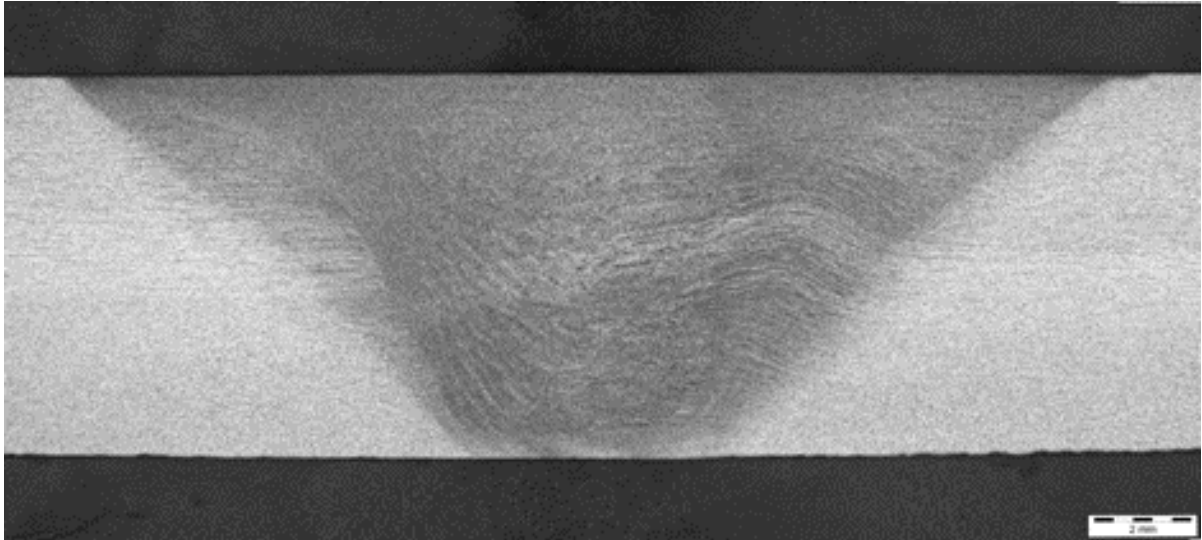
Friction stir butt weld made between two plates of 8mm thick DH36 steel.
